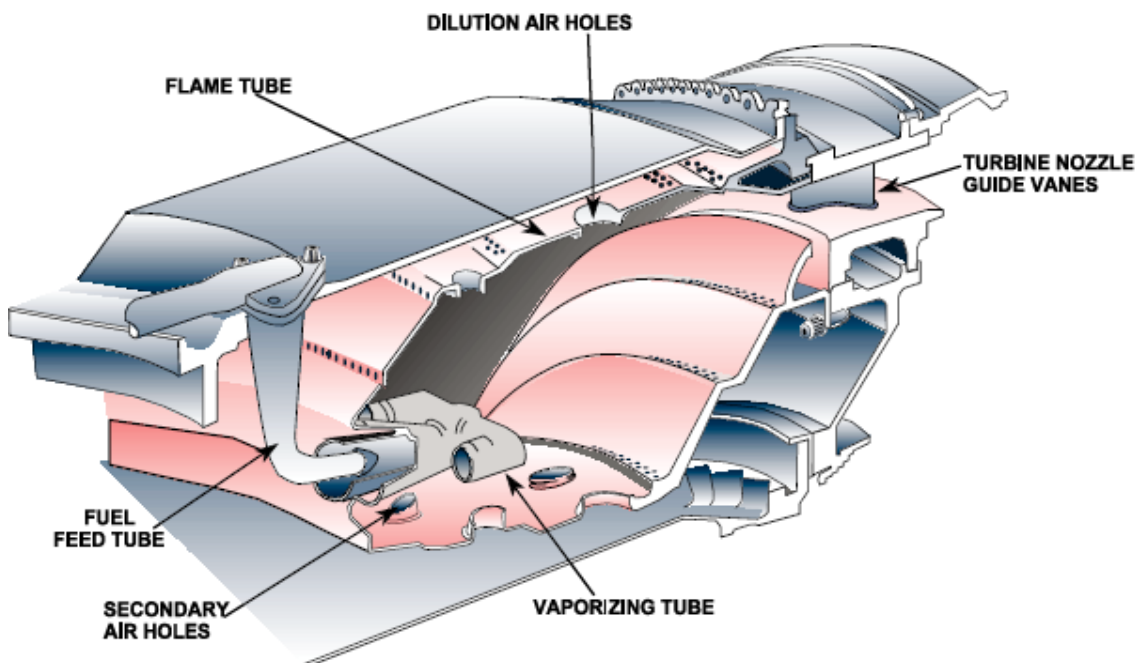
The vaporising tube system. *Courtesy of Jeppesen
